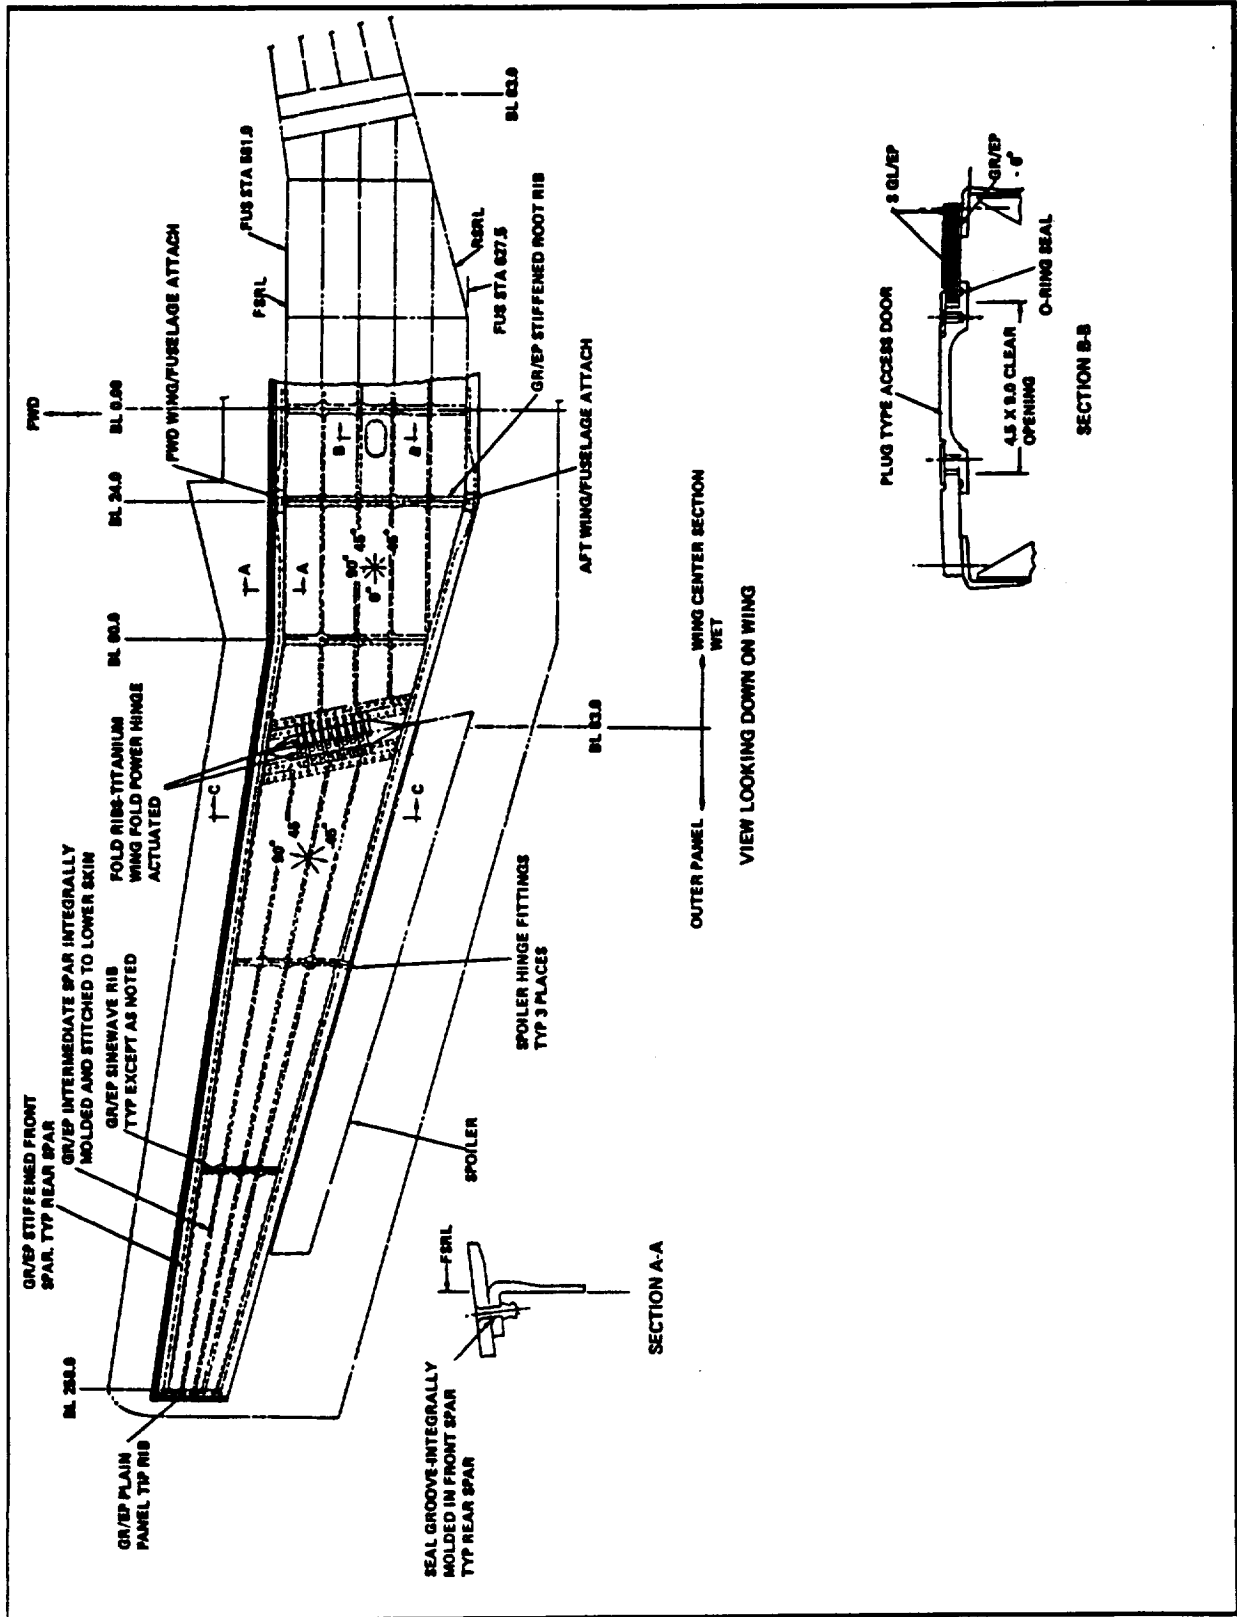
Detailed VSTOL Wing Structural Arrangement
